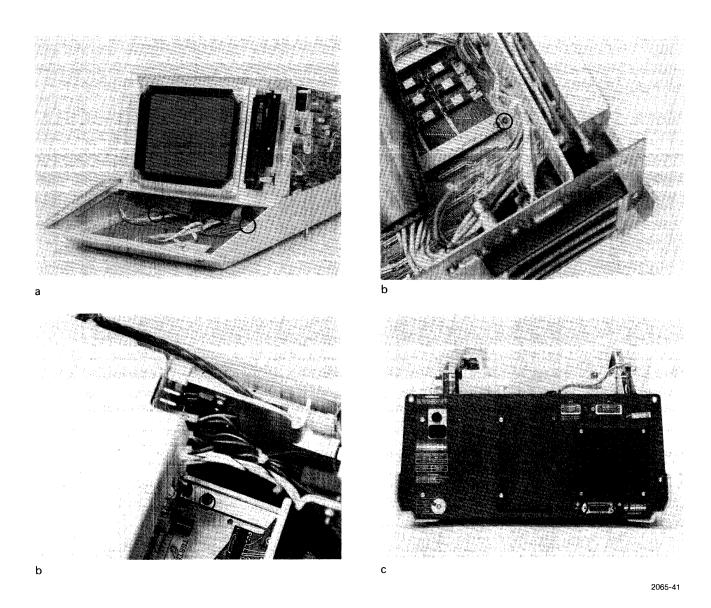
Screw pairs securing the cpu board; (a) front (b) top and (c) rear views.
